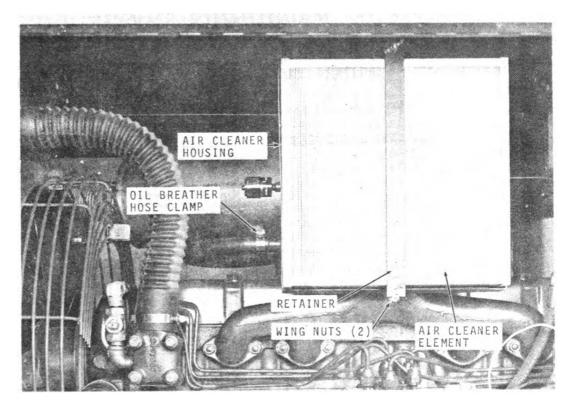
Air cleaner assembly (Sheet 1 of 2).
